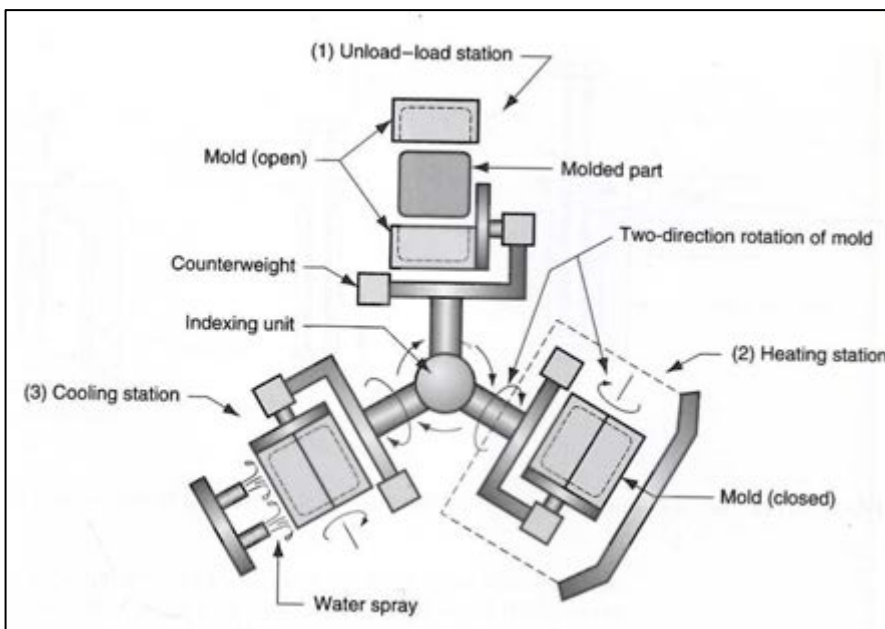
Three-station Rotational molding machine (Grover, 2013).
